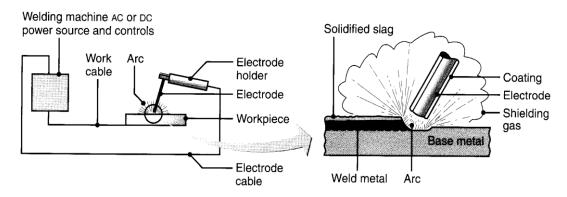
Schematic illustration of the shielded metal-arc welding process. (Kalpakjian, 2010)
